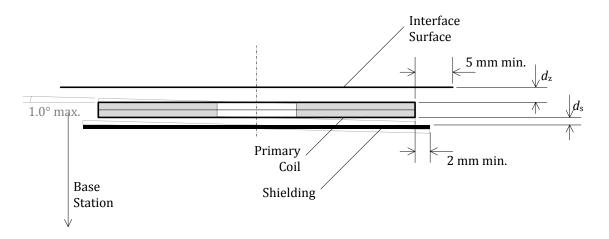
Primary Coil assembly of Power Transmitter design A2
